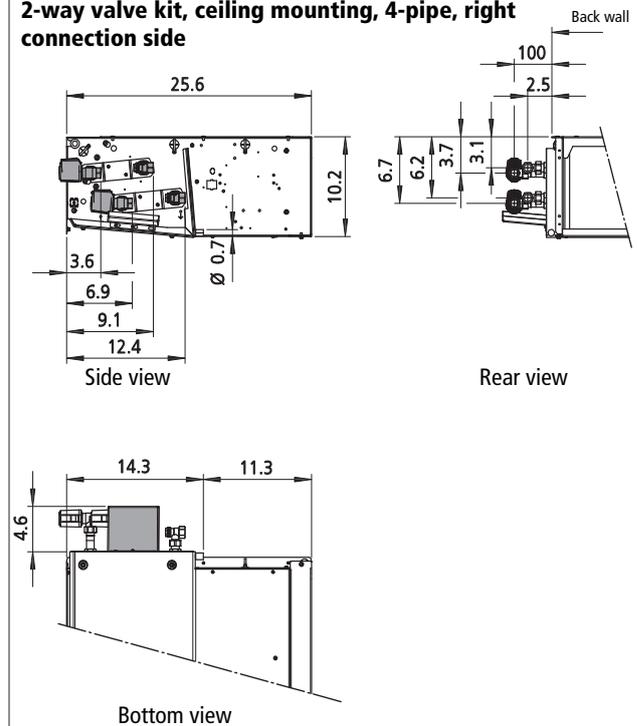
Dimensions 2-way valve kit (ceiling-mounted version)
